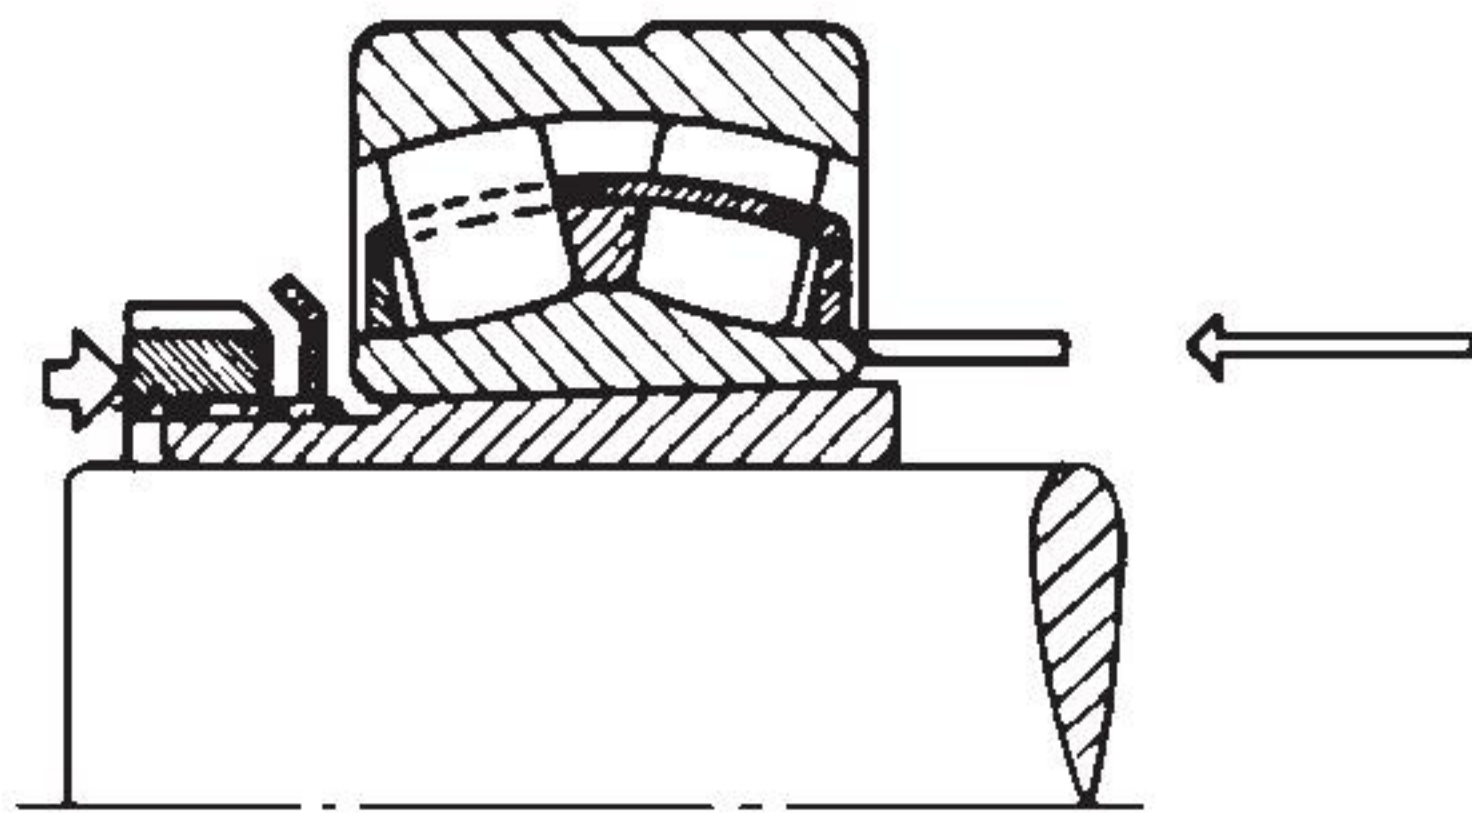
Bearing removal by driving bearing down tapered sleeve.
